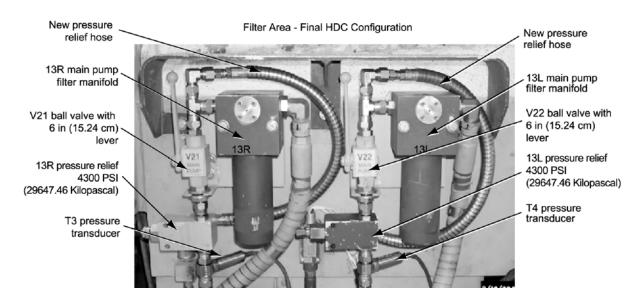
Installation of Modified Main Pump Hydraulic Filter Assemblies
